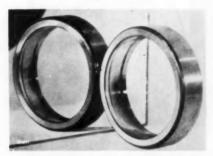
Overloading from distortion of a bearing ring is shown by a locallized failure pattern. A mirror here shows how flaking occurred on opposite sides of this ring forced out of round by its housing.
